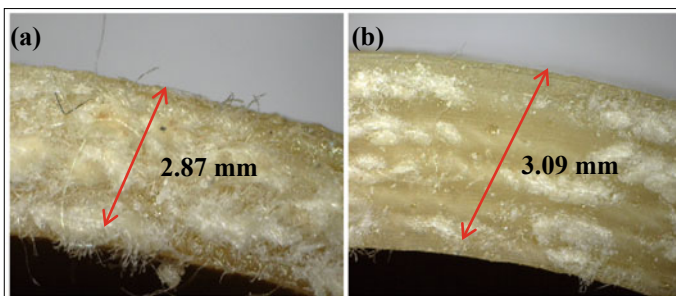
Magnified composites manufactured by (a) vacuum bagging (b) heat shrink tube method
